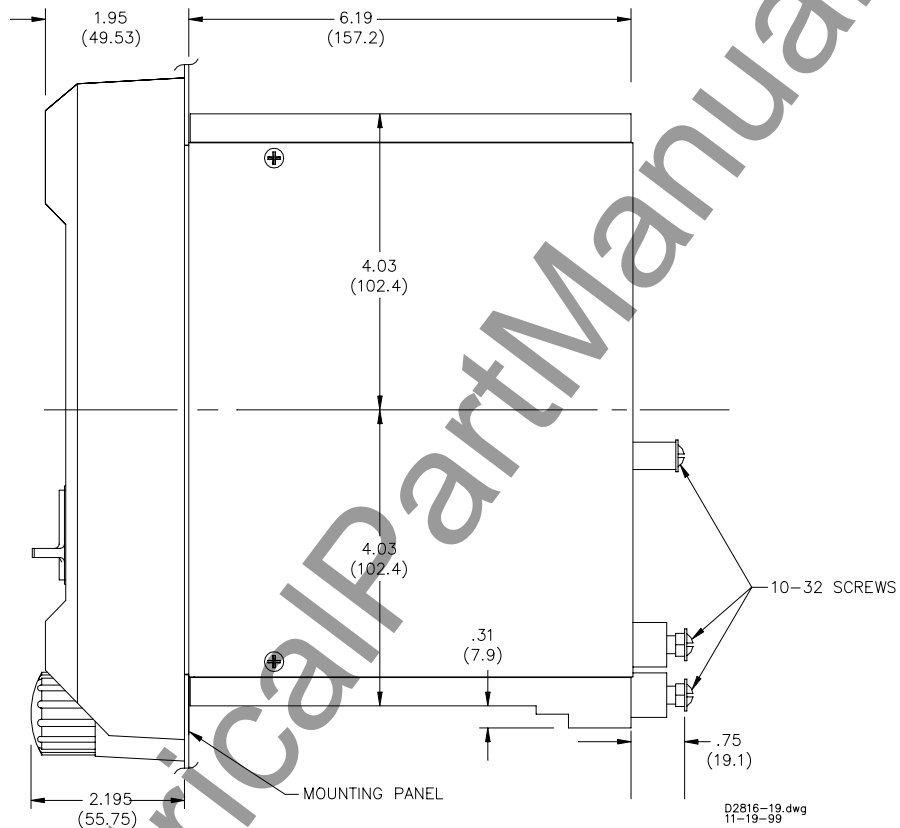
S1 Case, Single-Ended, Semi-Flush Mounting, Outline Dimensions, Side View
